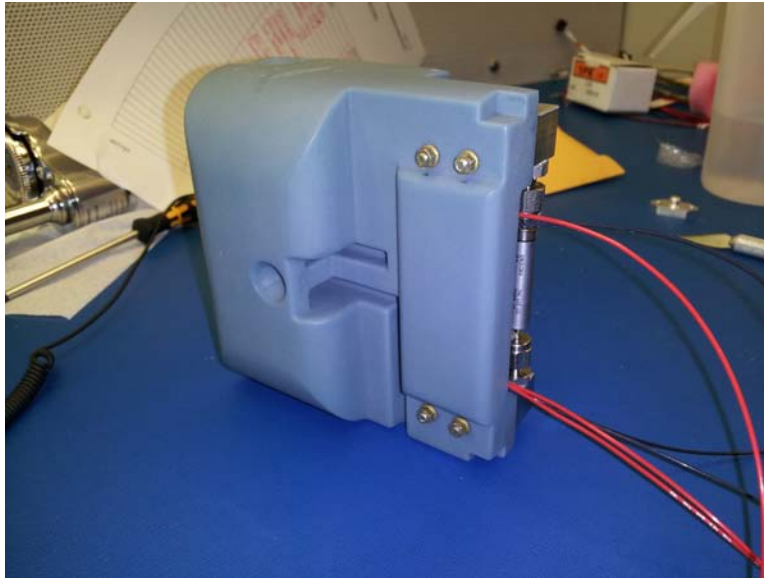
The Bevo-2 thruster being assembled before a leak check [3]
